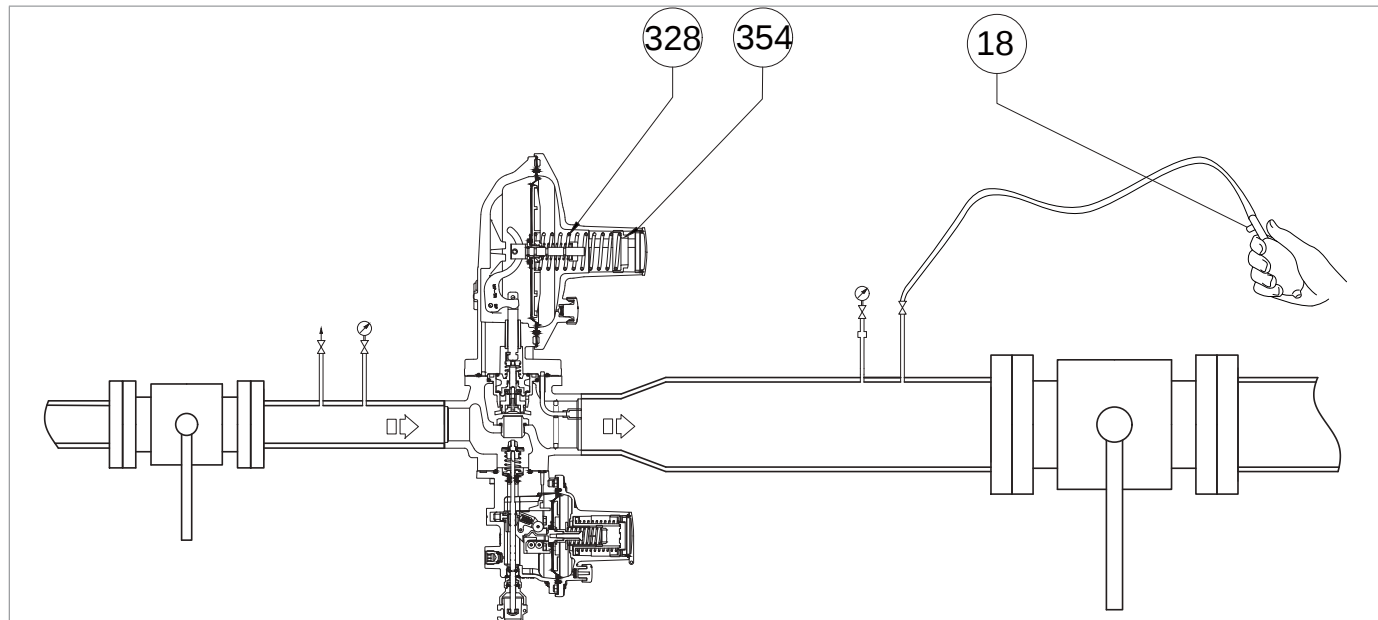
Pressurising with external source for incorporated LA slam-shut valve
